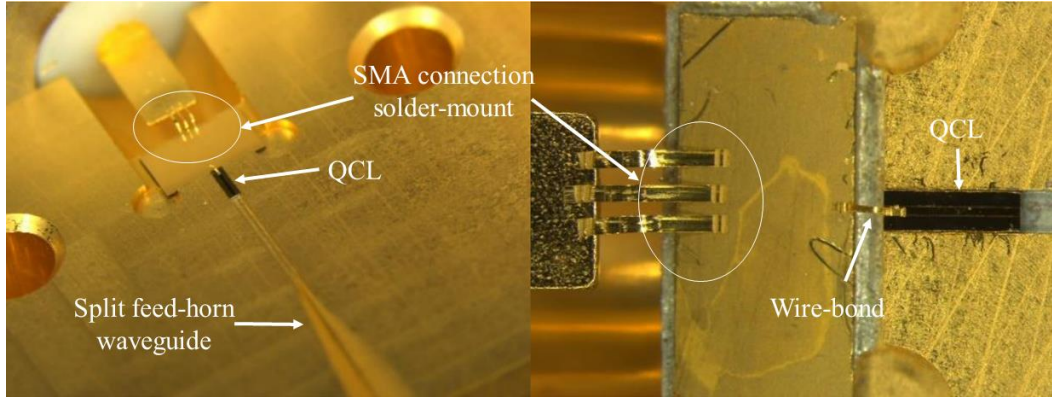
Block integration of THz QCL with solder-mounting inside a micro-machined waveguide.
